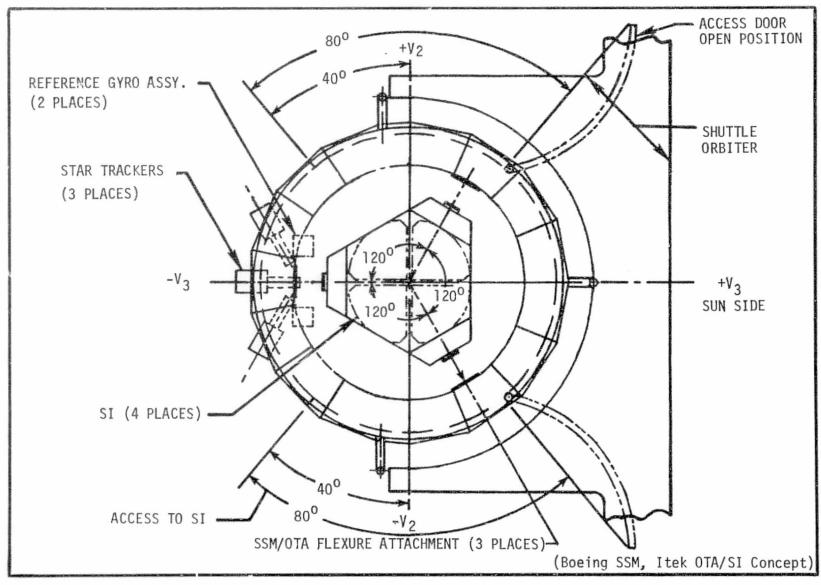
LST SSM-OTA Attachment Orientation, SSM Equipment and SI Modules on Focal Plane Assembly
